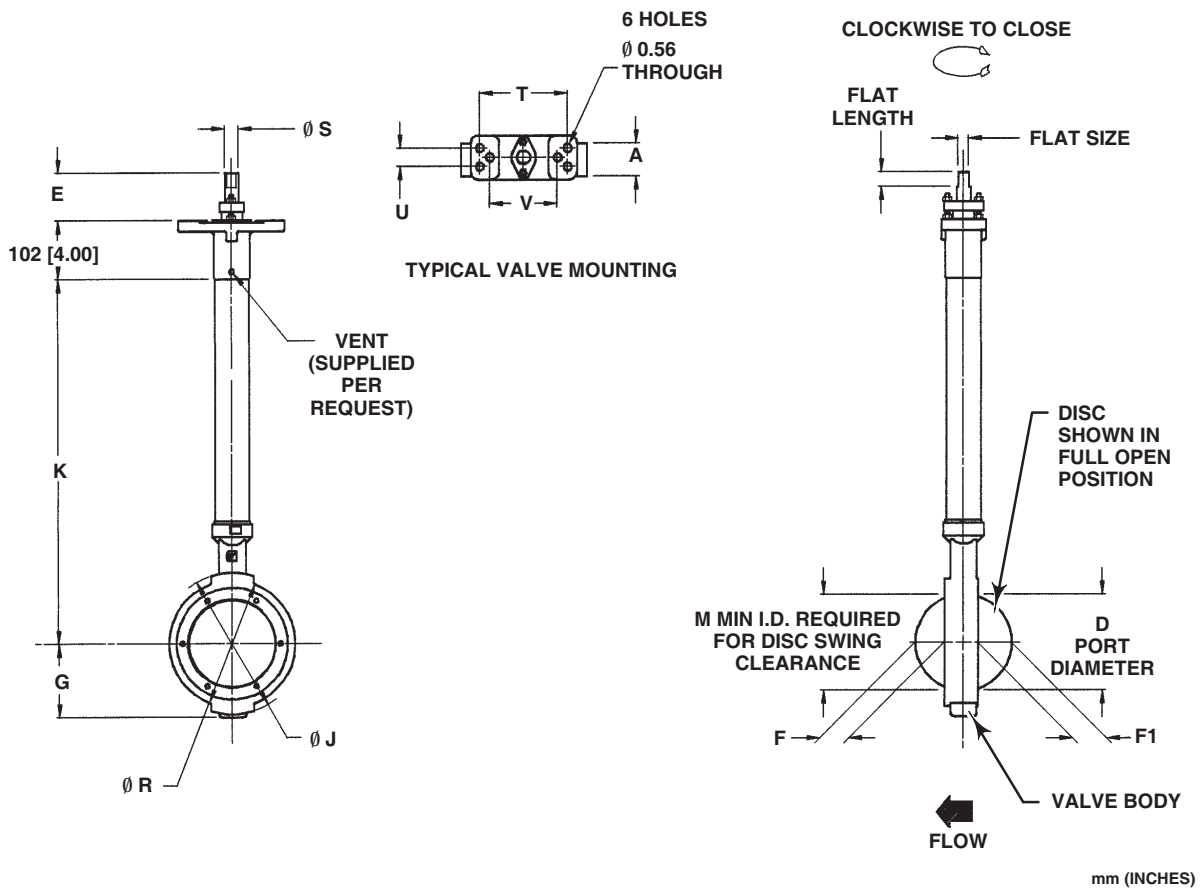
Dimensions, Single Flange Style Valves, CL150, NPS 3 through 8 (also see table 4)
